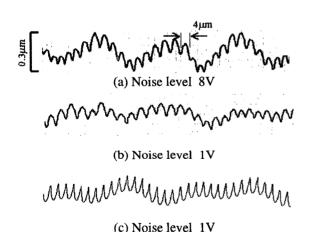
Machined Surface Profiles by the Vibration Cutting
